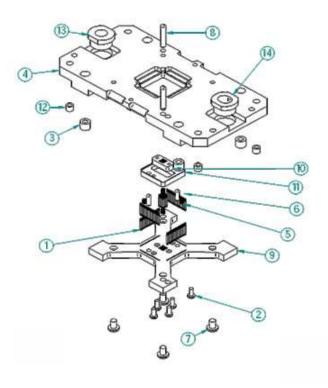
High speed dual channel 6-bit ADC (TQFN packaged) mounting socket assembly (bottom): 1 - Pogo pin, 2 - Button head screw, 3 - Threaded insert, 4 - Socket top, 5 - Sring, 6 - Dowel pin, 7 - Button head screw, 8 - Dowel pin, 9 - socket base, 10 - Retainer, 11 - Floating base, 12 - Threaded insert, 13 - Guide bushing, 14 - Guide bushing
